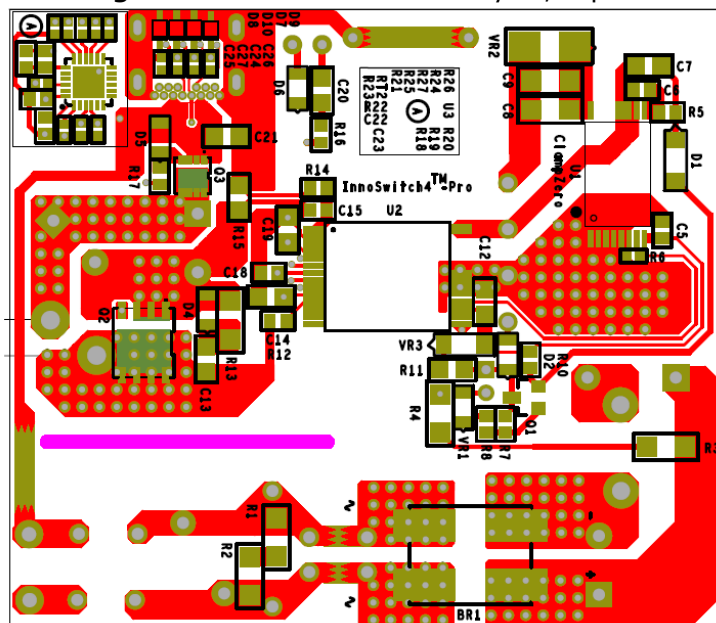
DER-942 RevB PCB Layout, Bottom.
